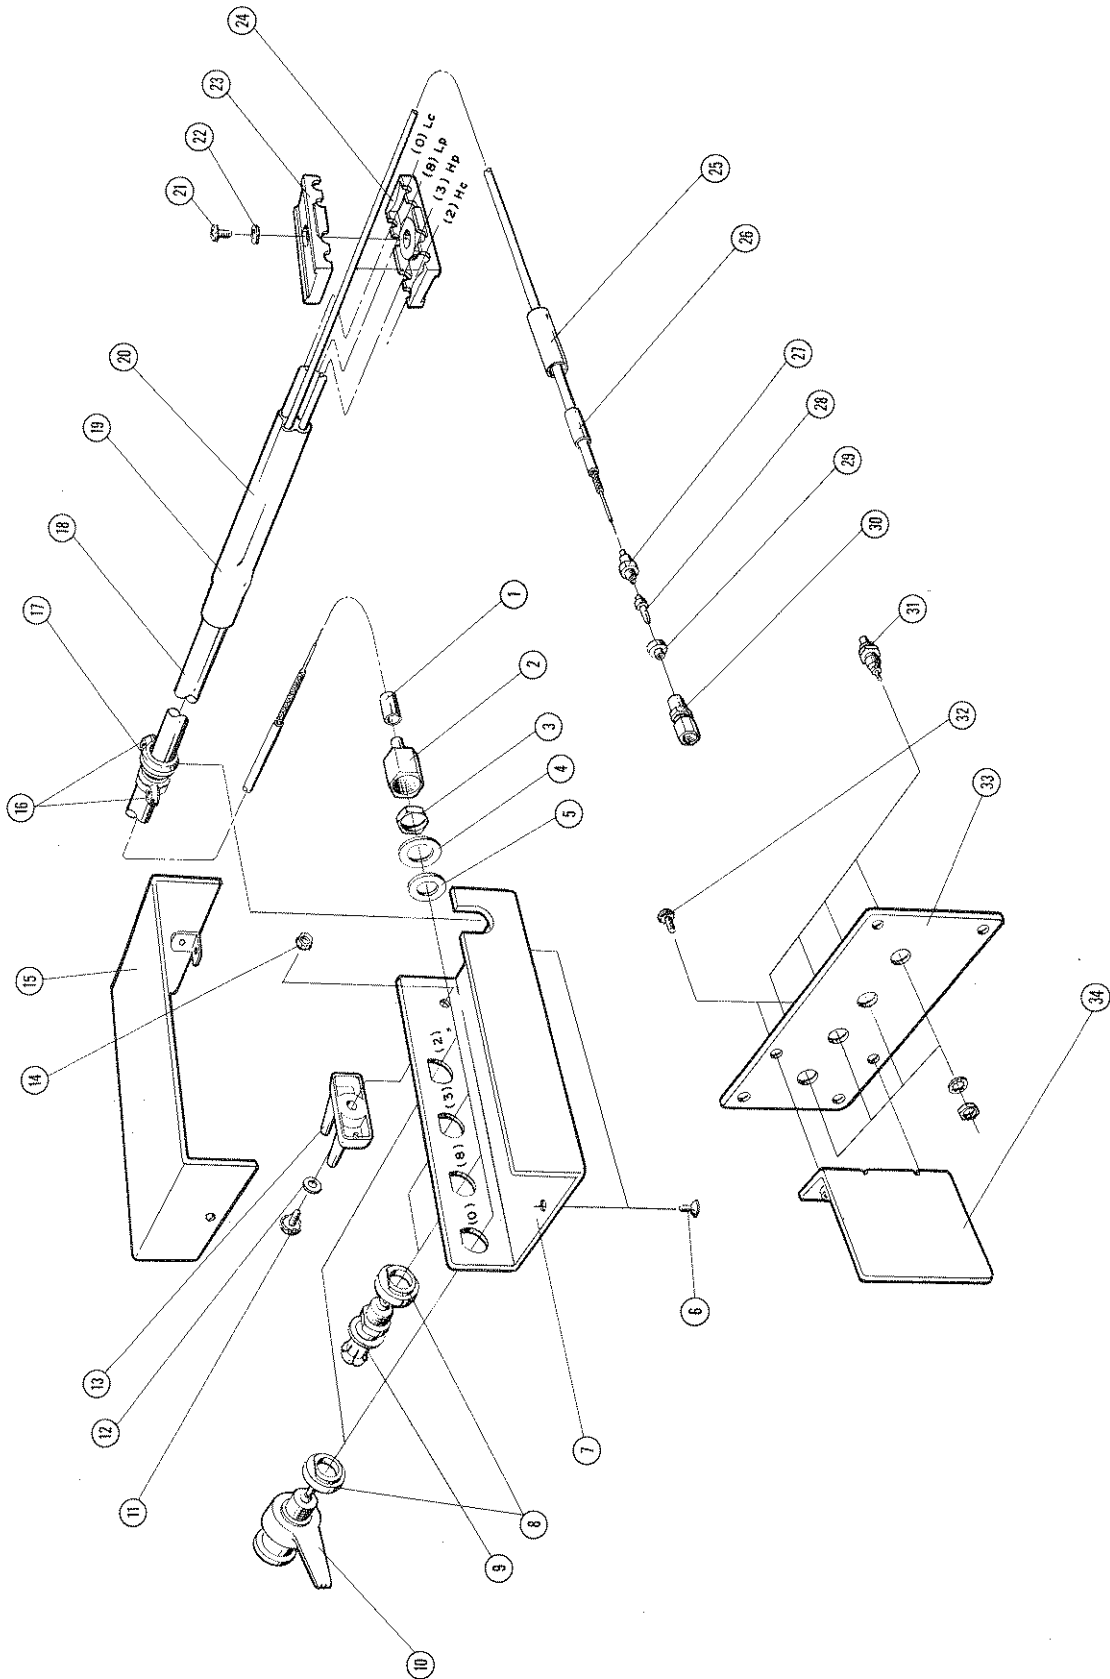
Parts Identification for 16048B (Sheet 1 of 2).
